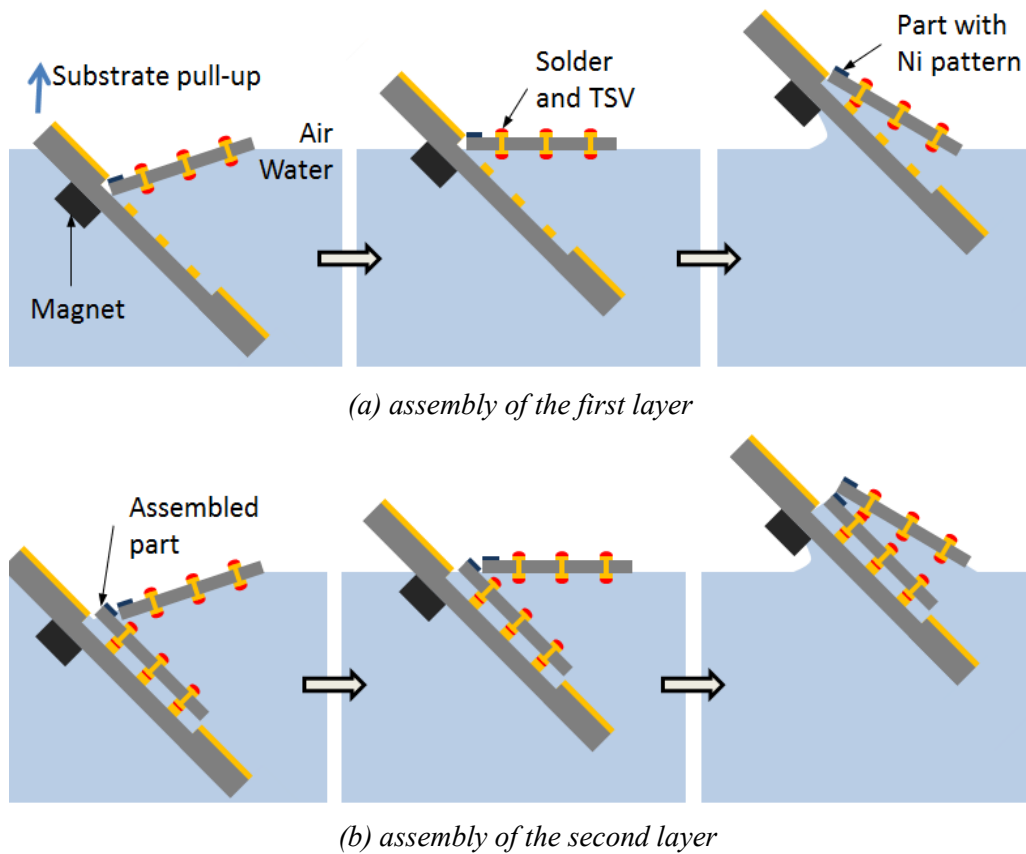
Assembly process. After assembly of each layer of parts, solder reflow process is needed for electrical and mechanical connection. 3D integration of multiple layers is achievable through a layer-by-layer assembly.
